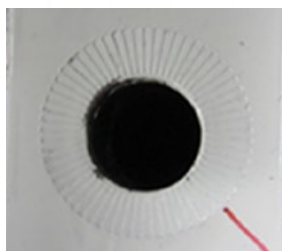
Painted surface after Junker Vibration test with Nord-Lock washers. Serration imprints clearly seen in the surface
